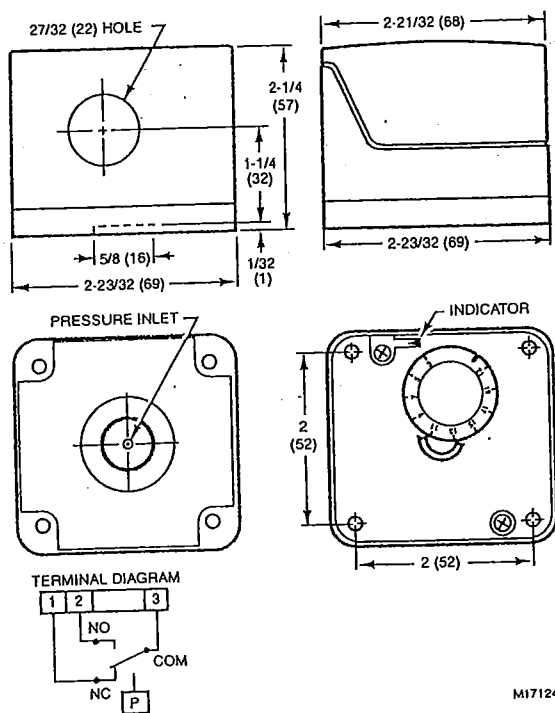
C6097 Flange Mount dimensions in In. (mm).
